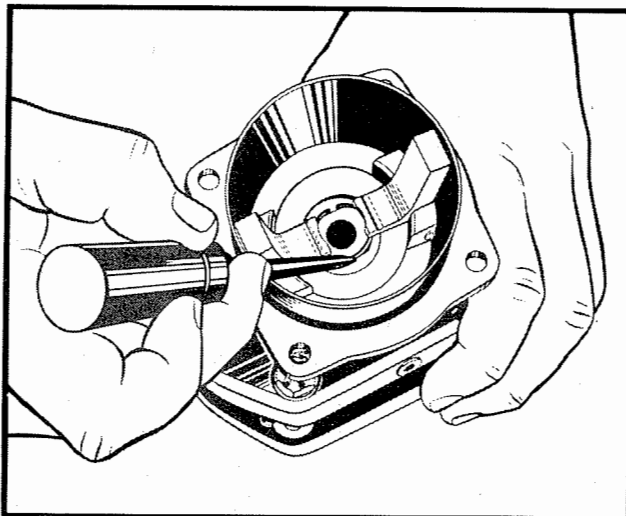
Inserting Fly-Weight Assembly Lock Ring
